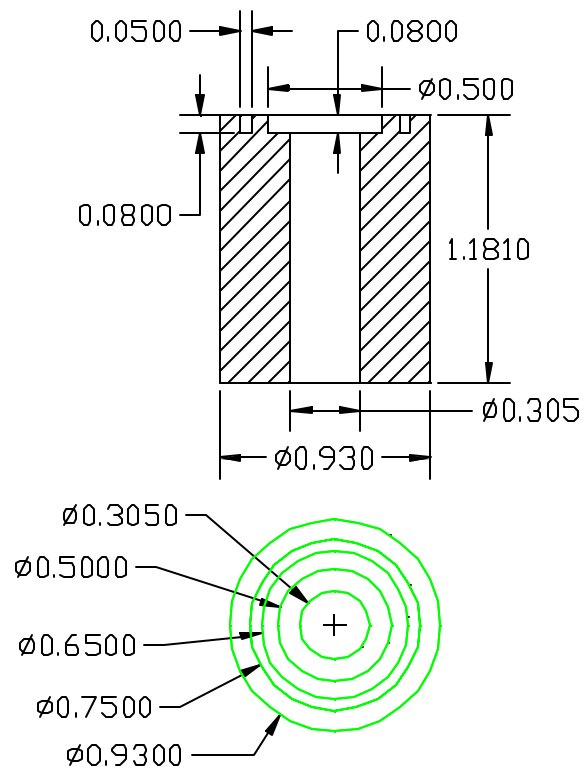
CAD drawings of the Teflon parts for the collector (all dimensions are in inches)
